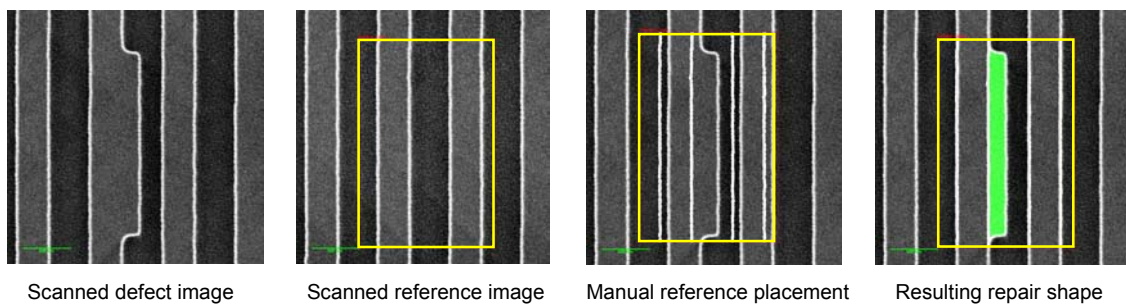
Example of a standard pattern copy sequence (MoSi protrusion programmed defect)
